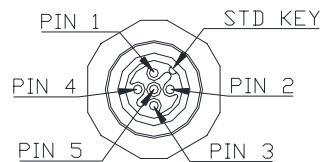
TURCK Connector Pin out (Ref. Drawing RMK0096)
